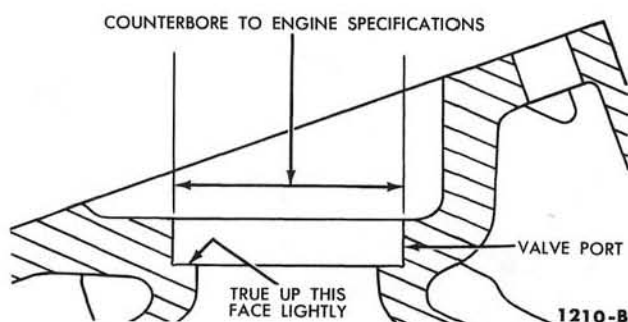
Counterbore For Oversize Insert—HD and SD V-8 Engines
